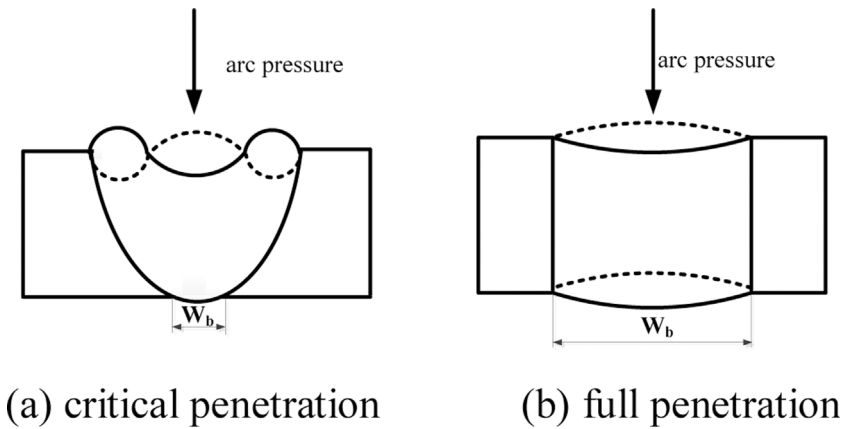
Stationary and low welding speed welding process. (a) Critical penetration. (b) Full penetration.
